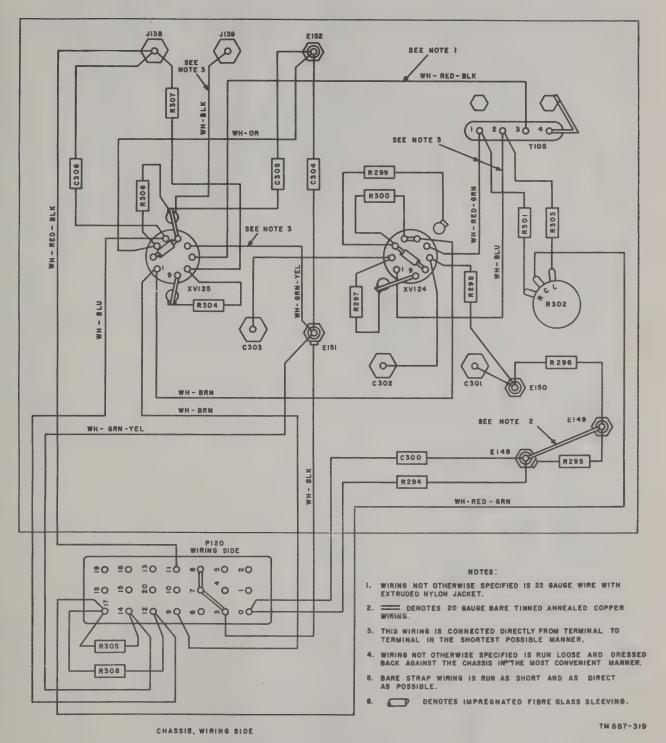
Transmitter afc modulator plug-in assembly, wiring diagram.
